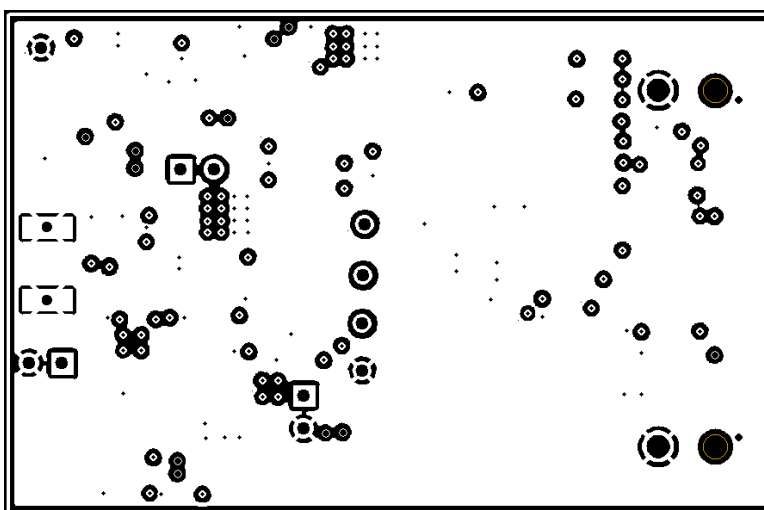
ADS7041EVM PCB: GND Layer (L2)
